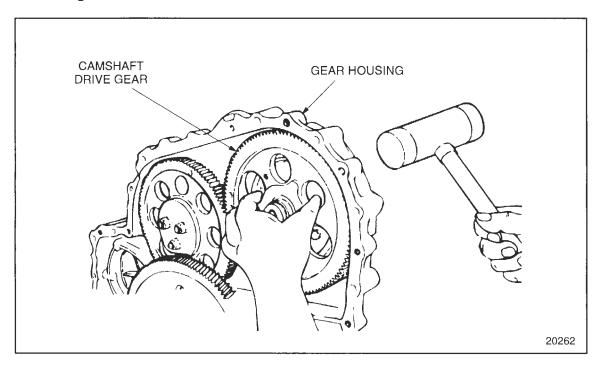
Removing Camshaft Thrust Plate Assembly
